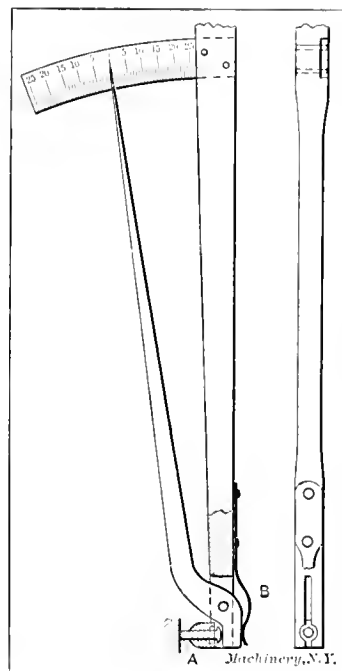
Detail of the Inside Caliper Indicator Attachment
